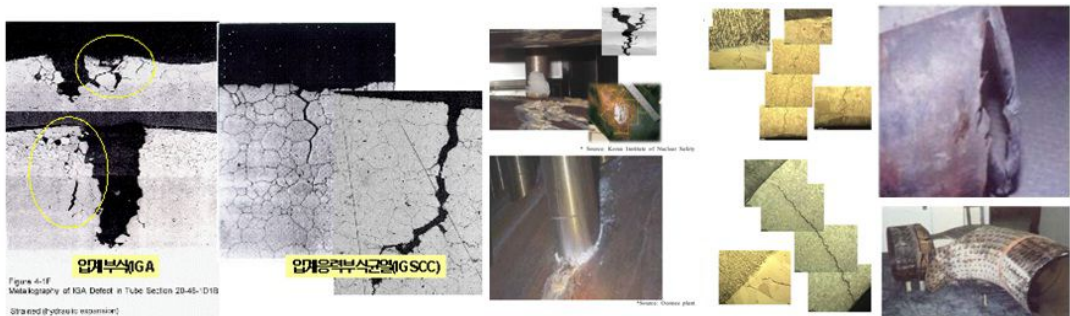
4. Failure and fracture of dissimilar weld metal.
